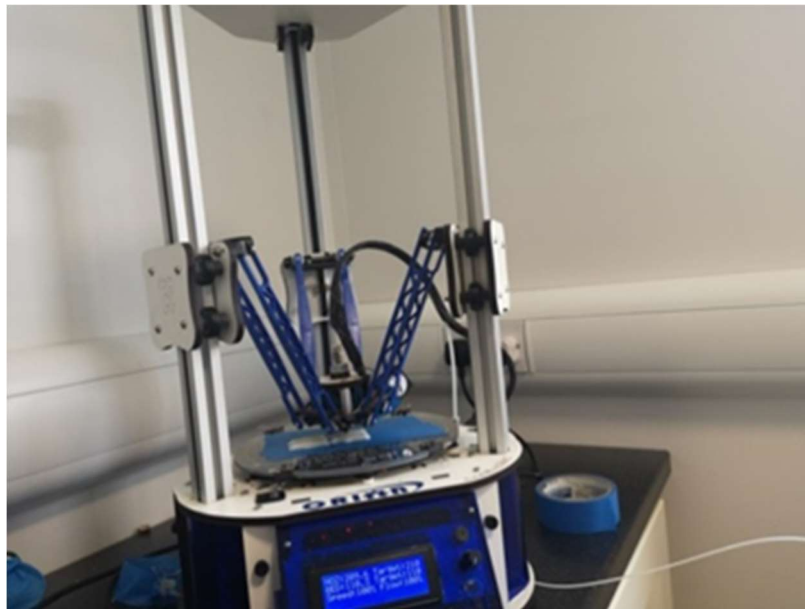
SeeMe CNC 3D Printer printing samples.
